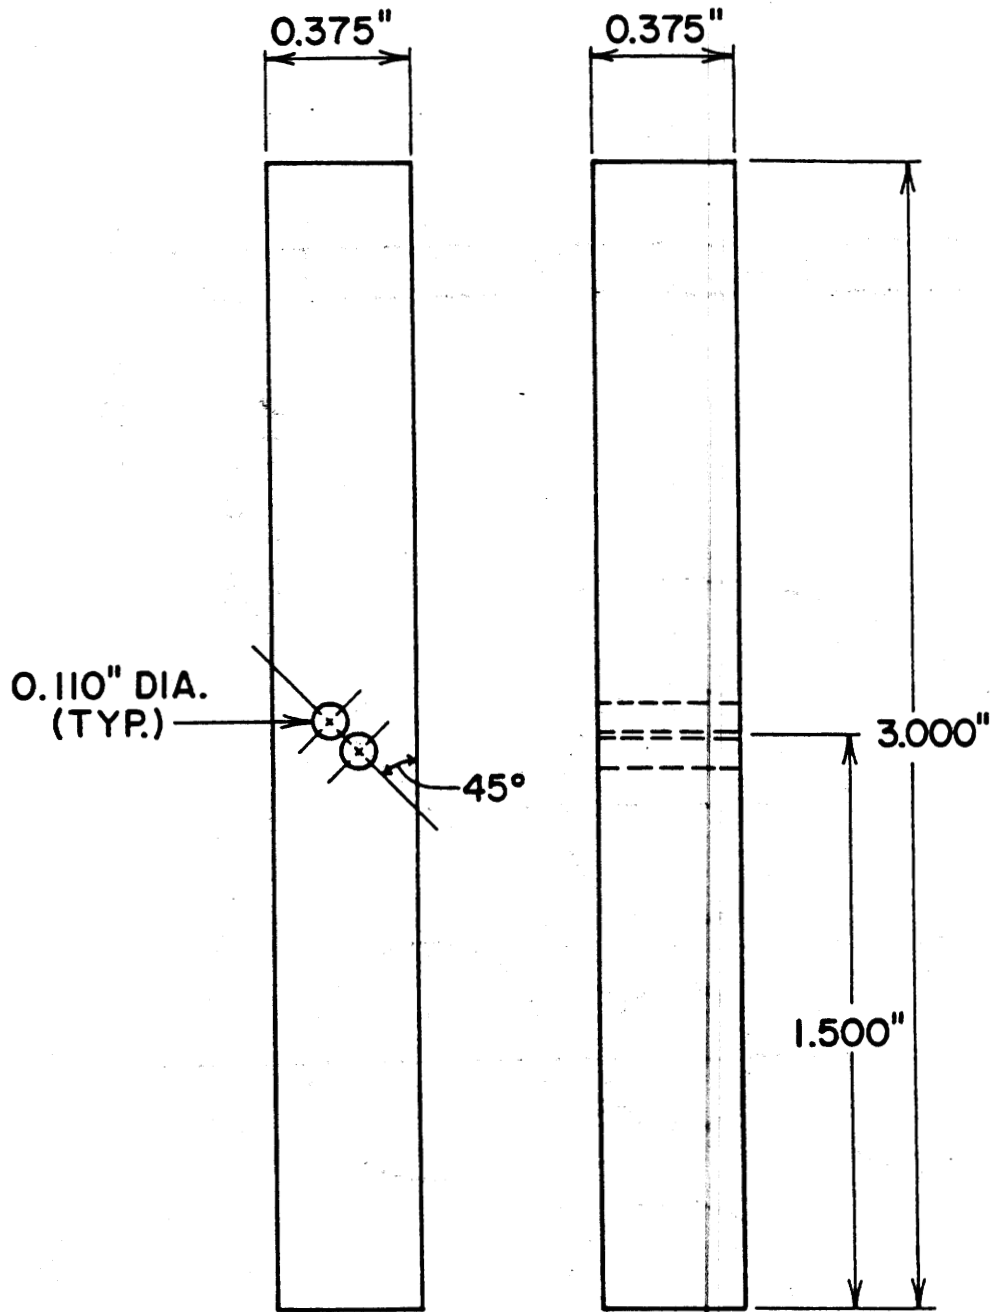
Manufacturing drawings--transducer assembly (bearing shield).
